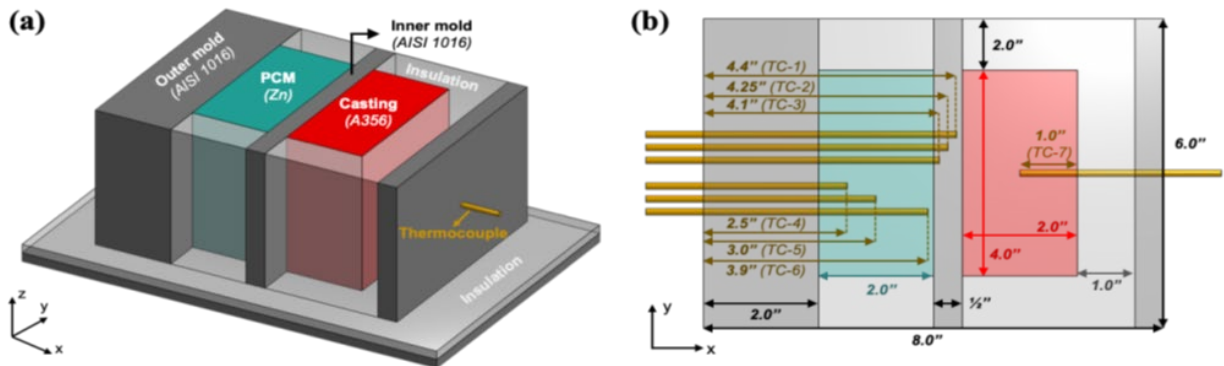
(a) A schematic of the Zn PCM mold utilized for casting trials and (b) a 2D configuration illustrating the geometric dimensions of the mold, Zn PCM, casting, and specific locations of thermocouple (TC) used.
